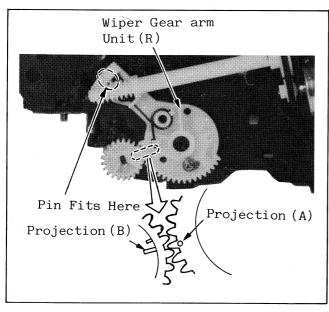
Adjustment of Cassette Up Gears-(3)
